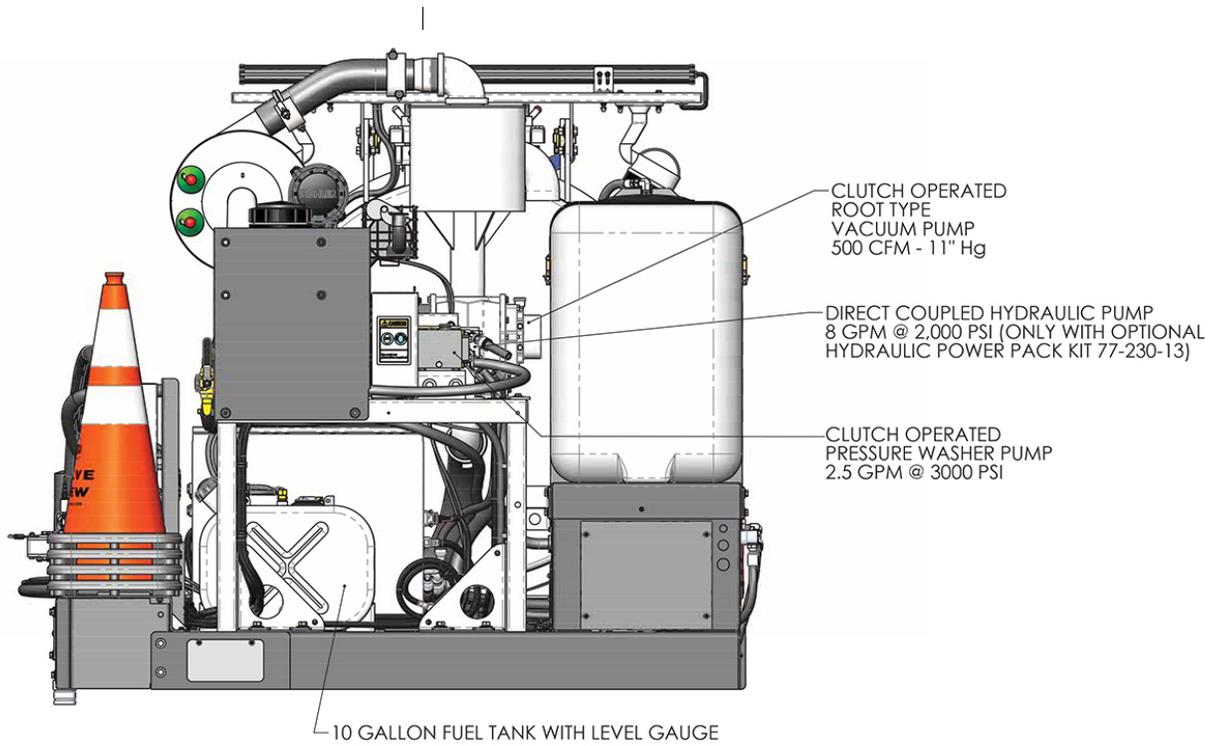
The drawing shows the front view of the Standard Builder gas engine configuration, 77-000-61.
